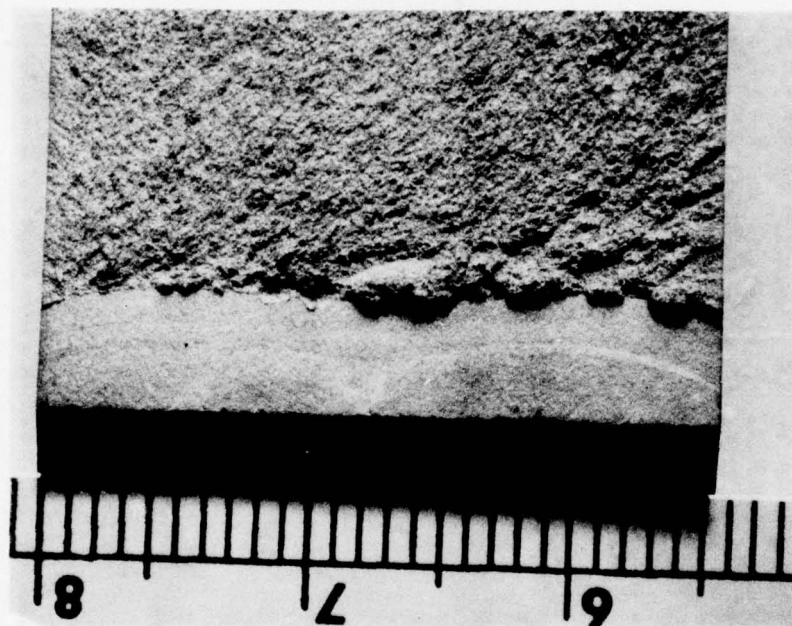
HY-130 base-metal Charpy specimen FKS-R22 fracture
